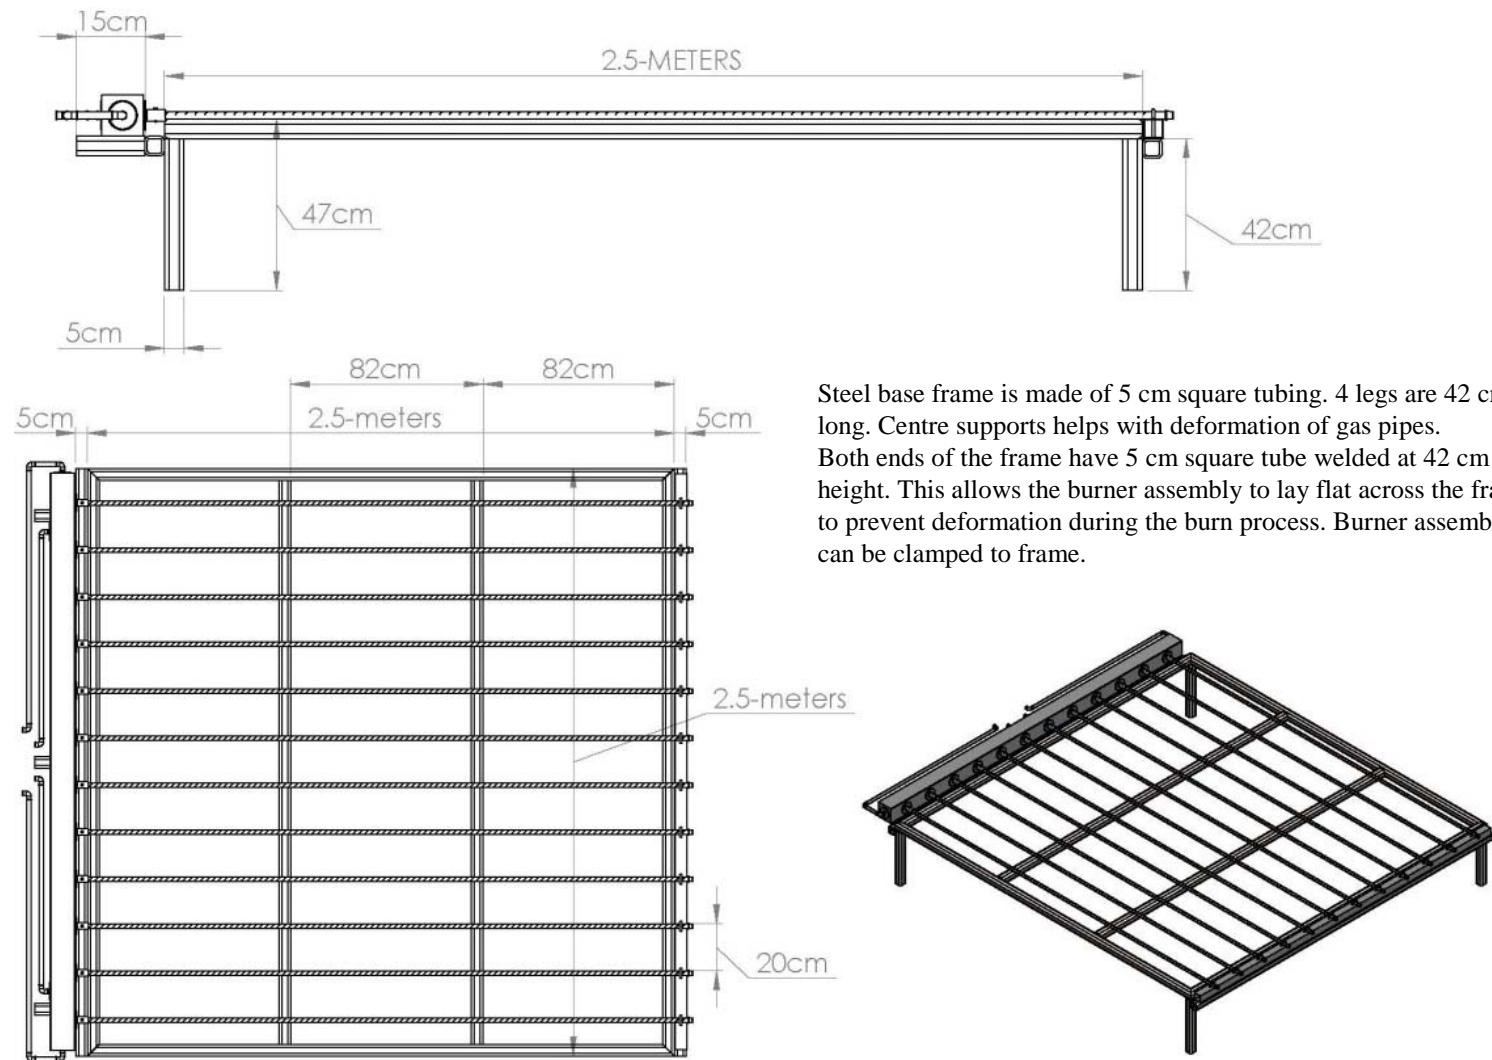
Proposed USA gas-fueled Test 6c burner assembly
